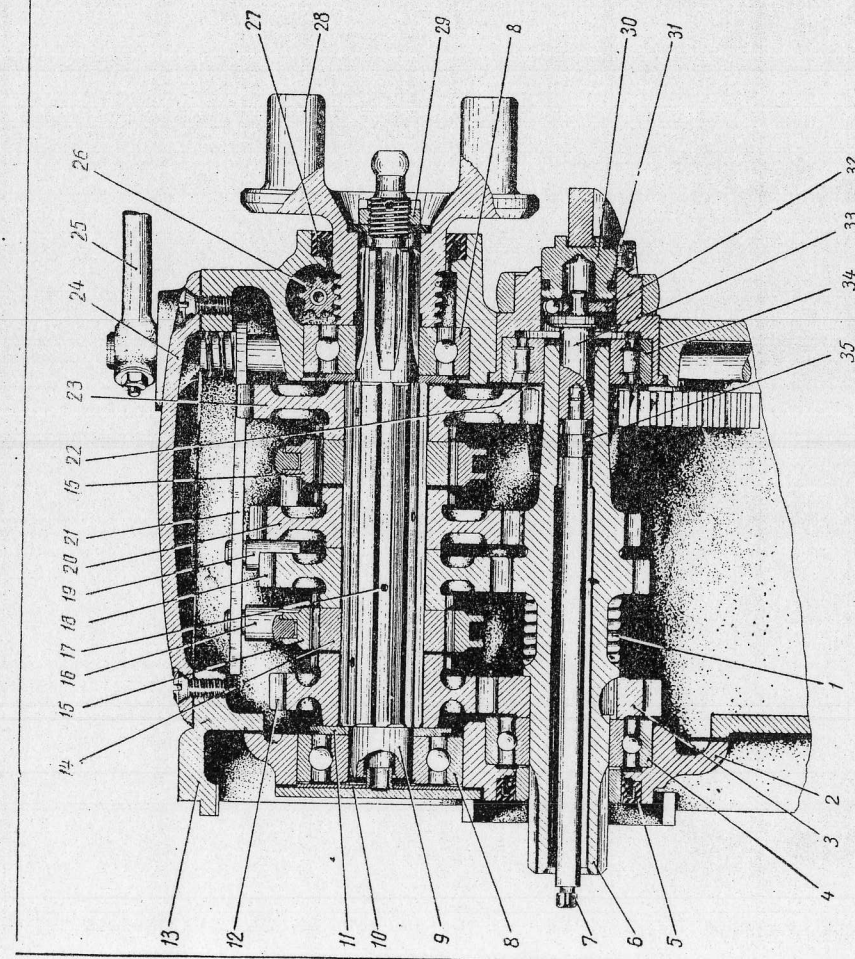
Gearbox (sectional view): 1 — starter spring; 2 — gearbox front cover; 3 — clutch shaft IV gear; 4 — clutch shaft ball bearing; 5 — clutch shaft oil seal; 6 — clutch shaft; 7 — clutch release rod; 8 — main shaft ball bearing; 9 — main shaft; 10 — front bearing cover shield; 11 — main shaft oil baffle; 12 — main shaft IV gear; 13 — box proper; 14 — main shaft sleeve; 15 — gear shift sleeve; 16 — III and IV gears shift fork; 17 — hole for oil feed to gears; 18 — main shaft III gear; 19 — I and II gears shift fork; 20 — main shaft II gear; 21 — gear shift quadrant; 22 — oil baffle; 23 — main shaft I gear; 24 — gearbox left cover; 25 — gear change hand lever; 26 — speedometer drive driven gear; 27 — main shaft oil seal; 28 — flexible coupling joint flange; 29 — main shaft nut; 30 — clutch release slider; 31 — slider oil seal; 32 — thrust ball bearing; 33 — clutch release rod tip; 34 — clutch shaft roller bearing; 35 — clutch release rod oil seal
